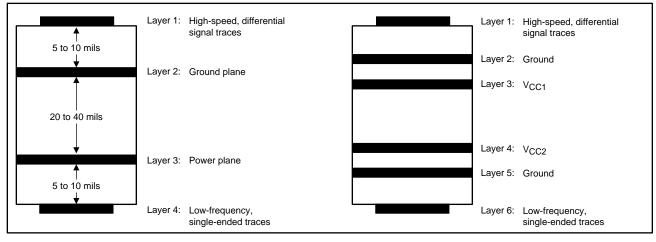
Recommended 4- or 6- Layer (0.062") Stack for a Receiver PCB Design
